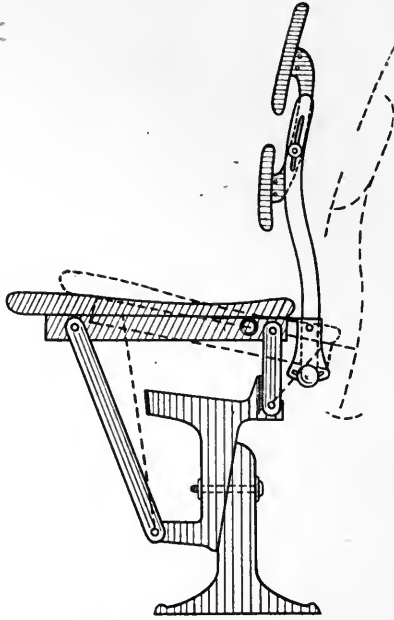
Adjustable school seat. (Miller and Stone.)
